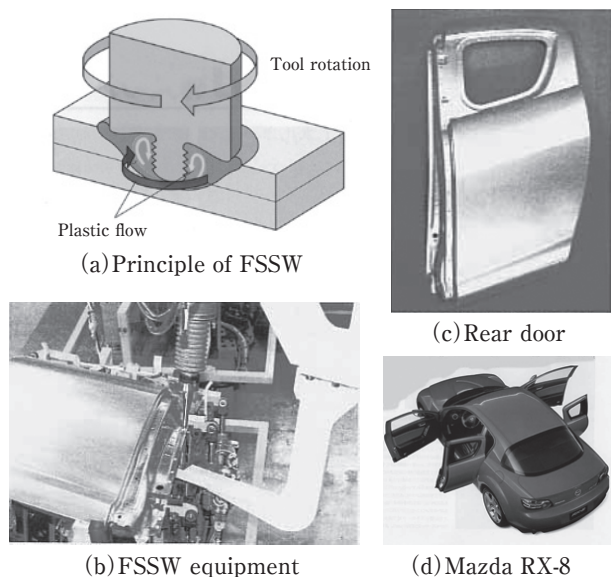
Friction stir spot welding for hoods and doors.
